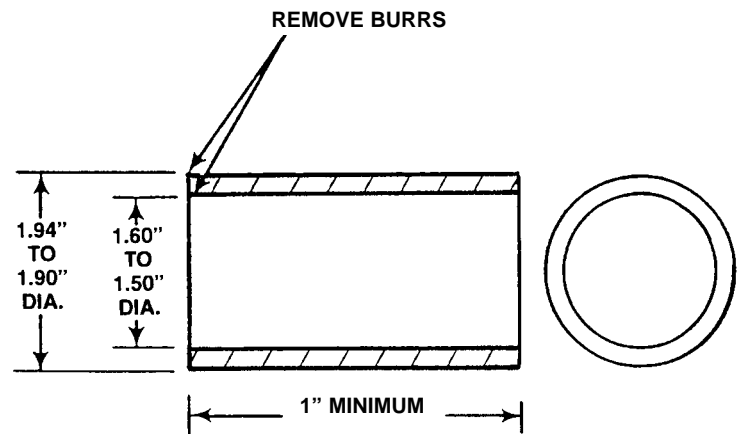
SEAL INSTALLATION TOOL
